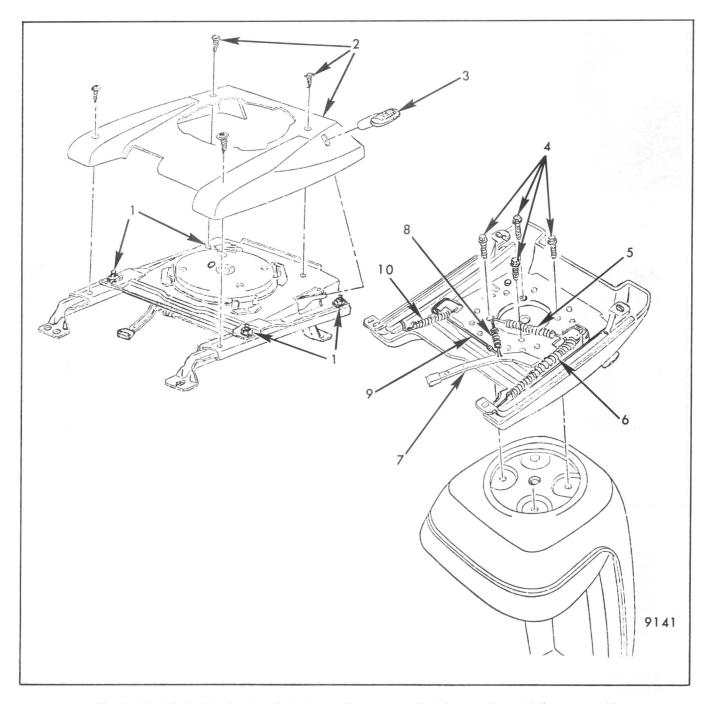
Swivel Shell Bucket Seat, Swivel and Adjuster Cover, Swivel Assembly and Adjuster Assembly
